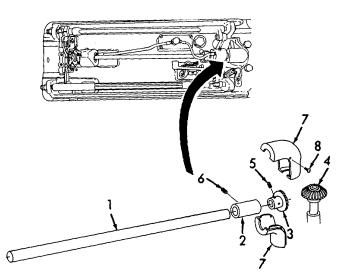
Bobbin Drive Shaft and Gears, Installation.
